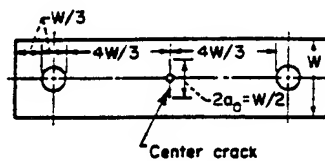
Center-Notched Tensile (CNT) Specimen.
